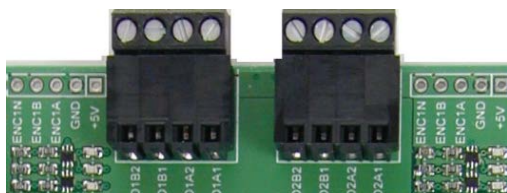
Encoder connectors for both motors can be soldered next to motor connectors.
